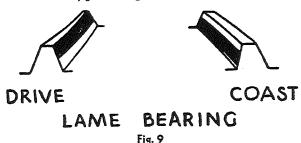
shows a lame bearing; gears can be adjusted to obtain a good driving condition but poor coast or reverse.
